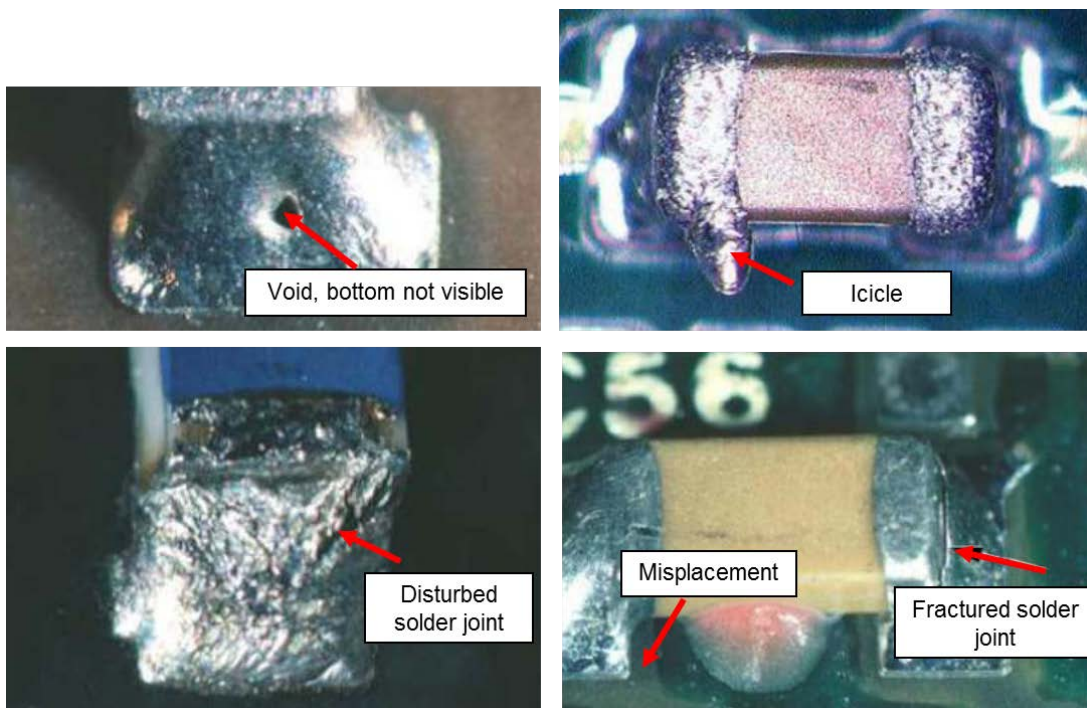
Examples of Unacceptable solder joints - (see also Table 11-1)
